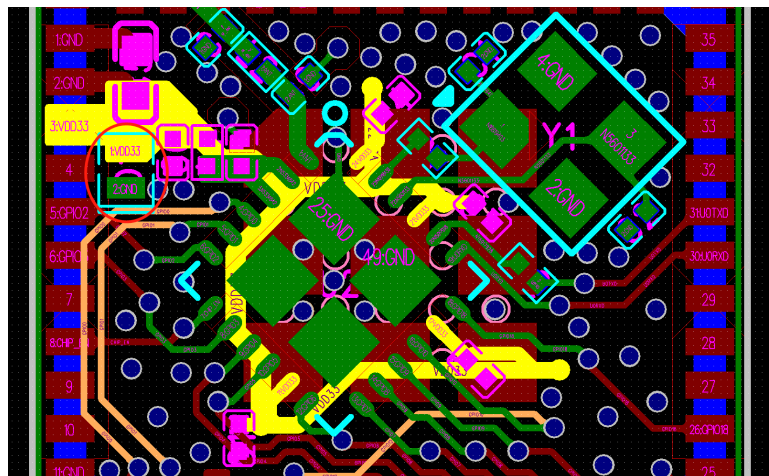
ESP8684 Power Traces in a Four-layer PCB Design
